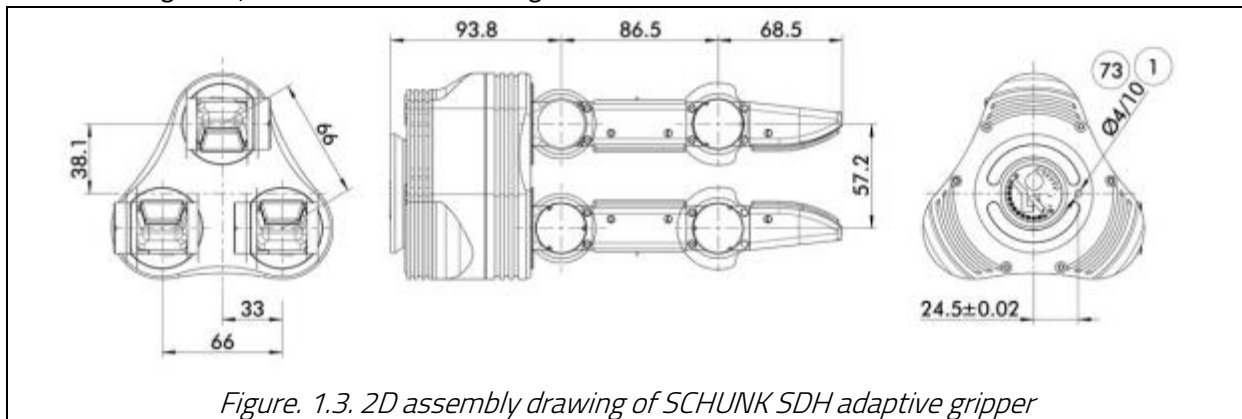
2D assembly drawing of SCHUNK SDH adaptive gripper
